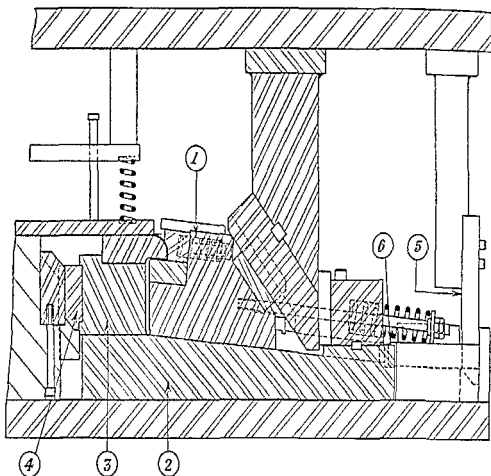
Cam-operated flanging die for workpiece shown in Fig. 12-13.
